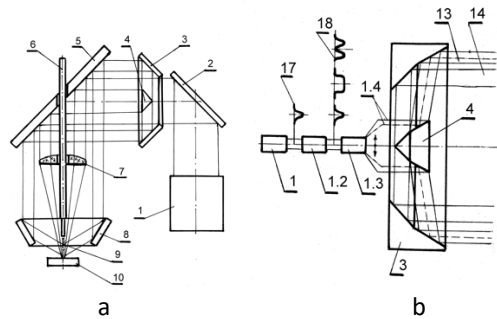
(a) Laser cladding optical scheme. (b) Multi beam forming scheme
